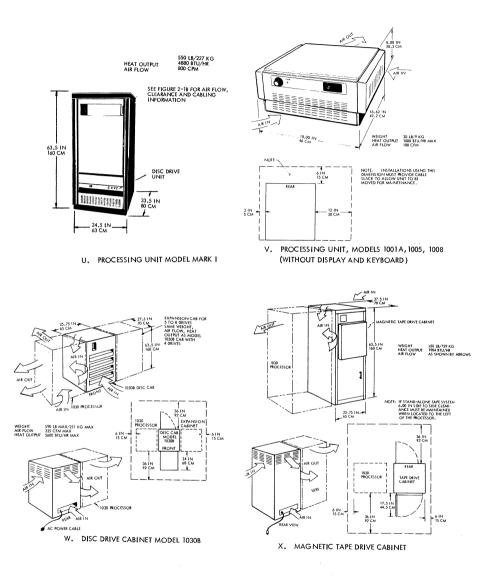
Cabling, Dimensions, Weight, Mounting Clearances, and Air Flow (Sheet 11 of 17)
